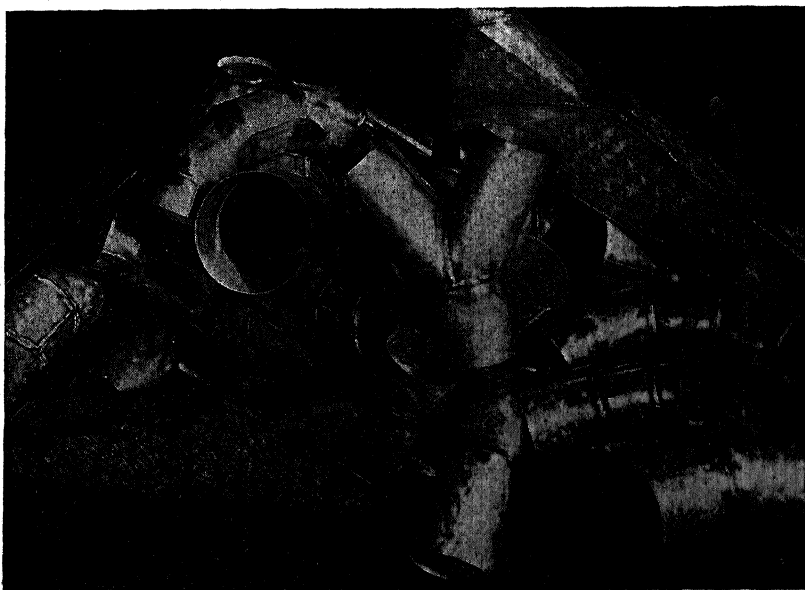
Elbows, Y's and other fittings for dust collecting systems fabricated from 22-gauge galvanized iron by the carbon arc process with copper alloy feeder rod. Joints are lap welds. Affords exceptionally strong, rigid, neat construction, replacing riveting and soldering.
